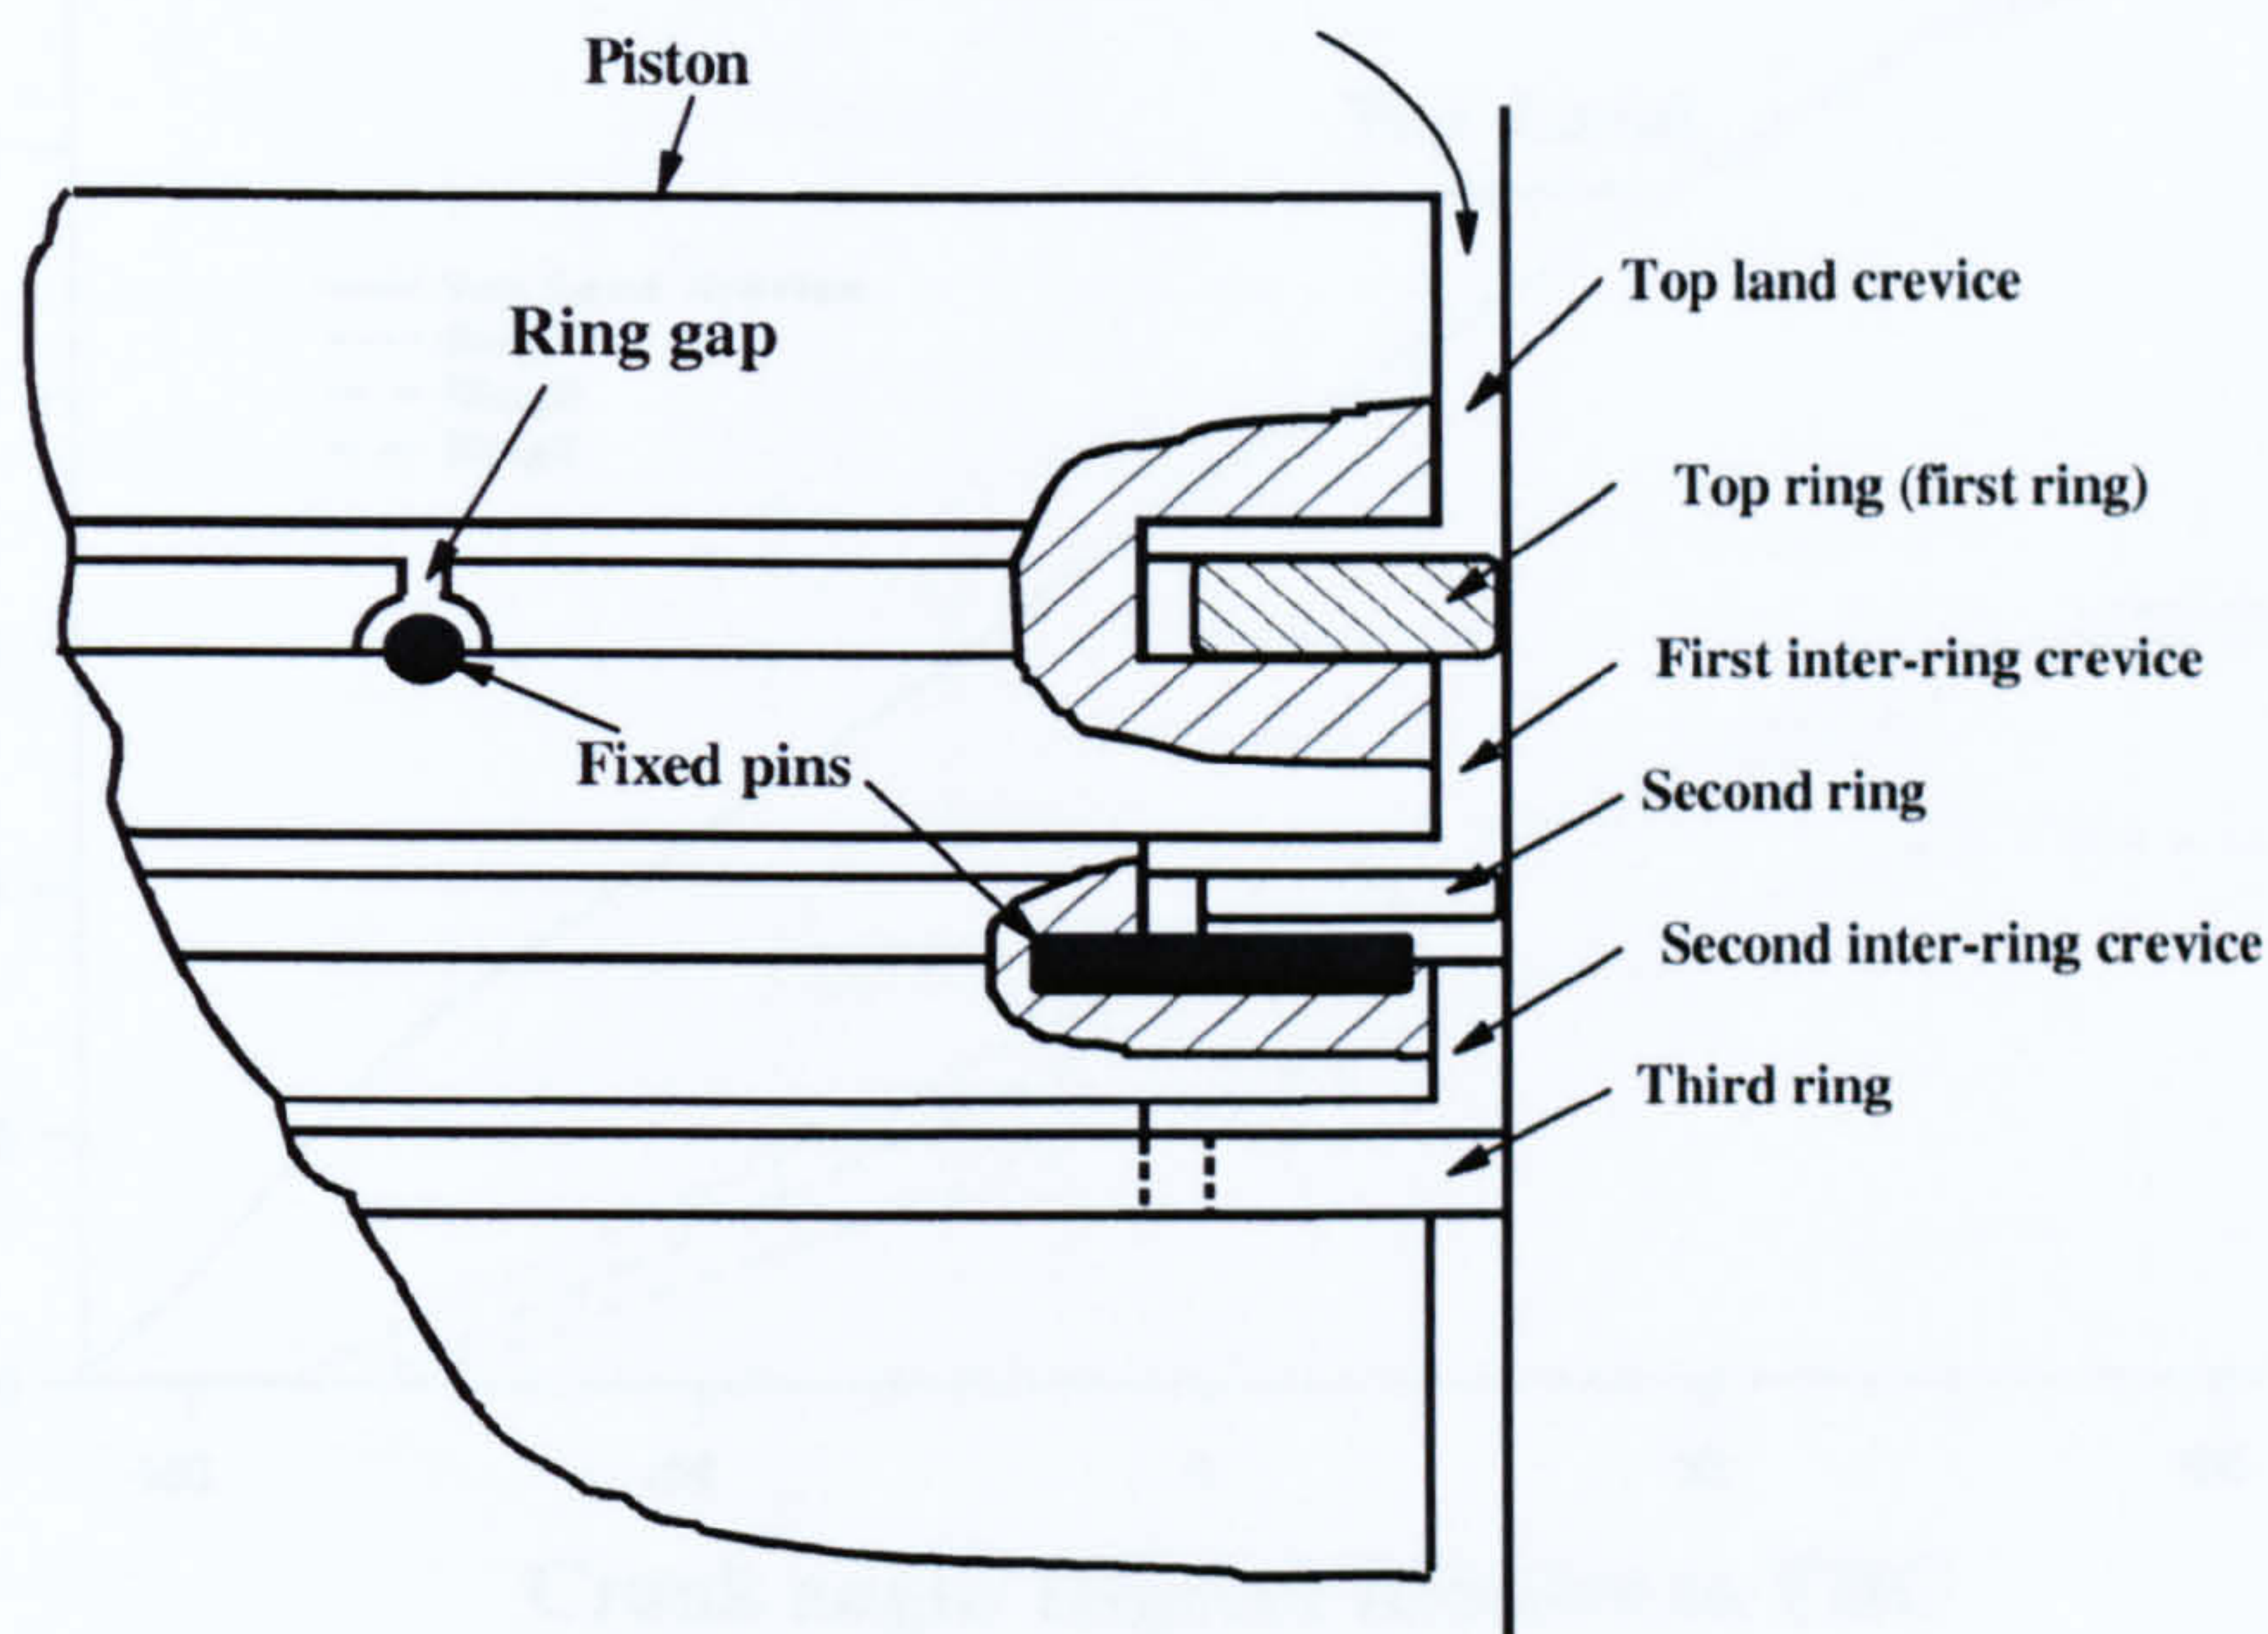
Schematic of ring gap and the fixed pin location in the ring-piston assembly of the LUPOE1 engine.
